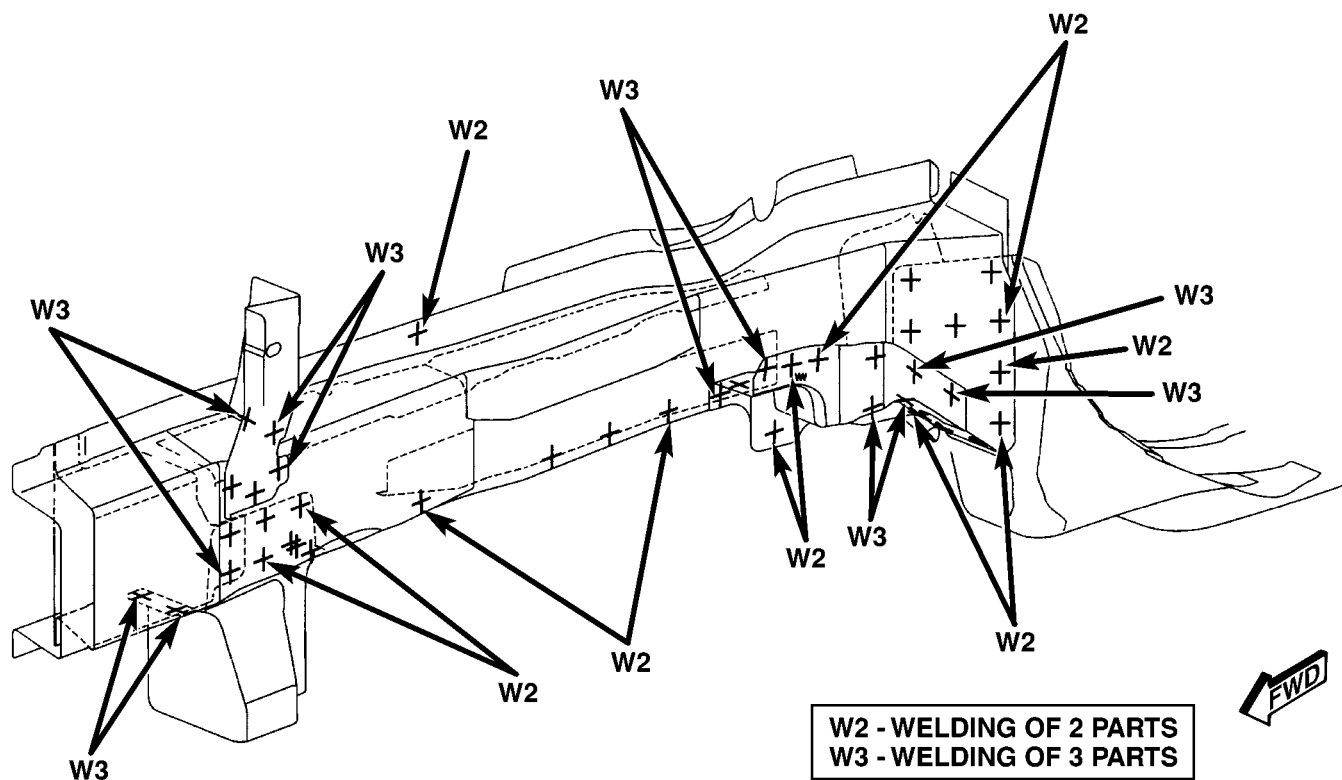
BUMPER EXTENSION, HEADLAMP SUPPORT RAIL, TO REAR FRONT SIDE RAIL
